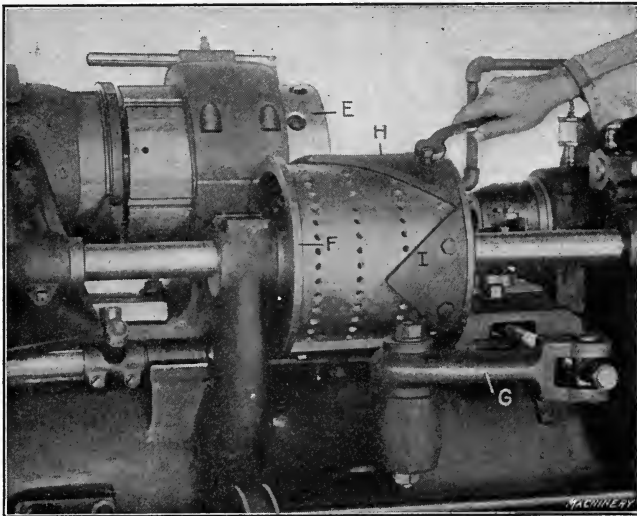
Cams on Cross-slide operating Drum, which are moved around to the Required Position and Clamped by Cap-screws
